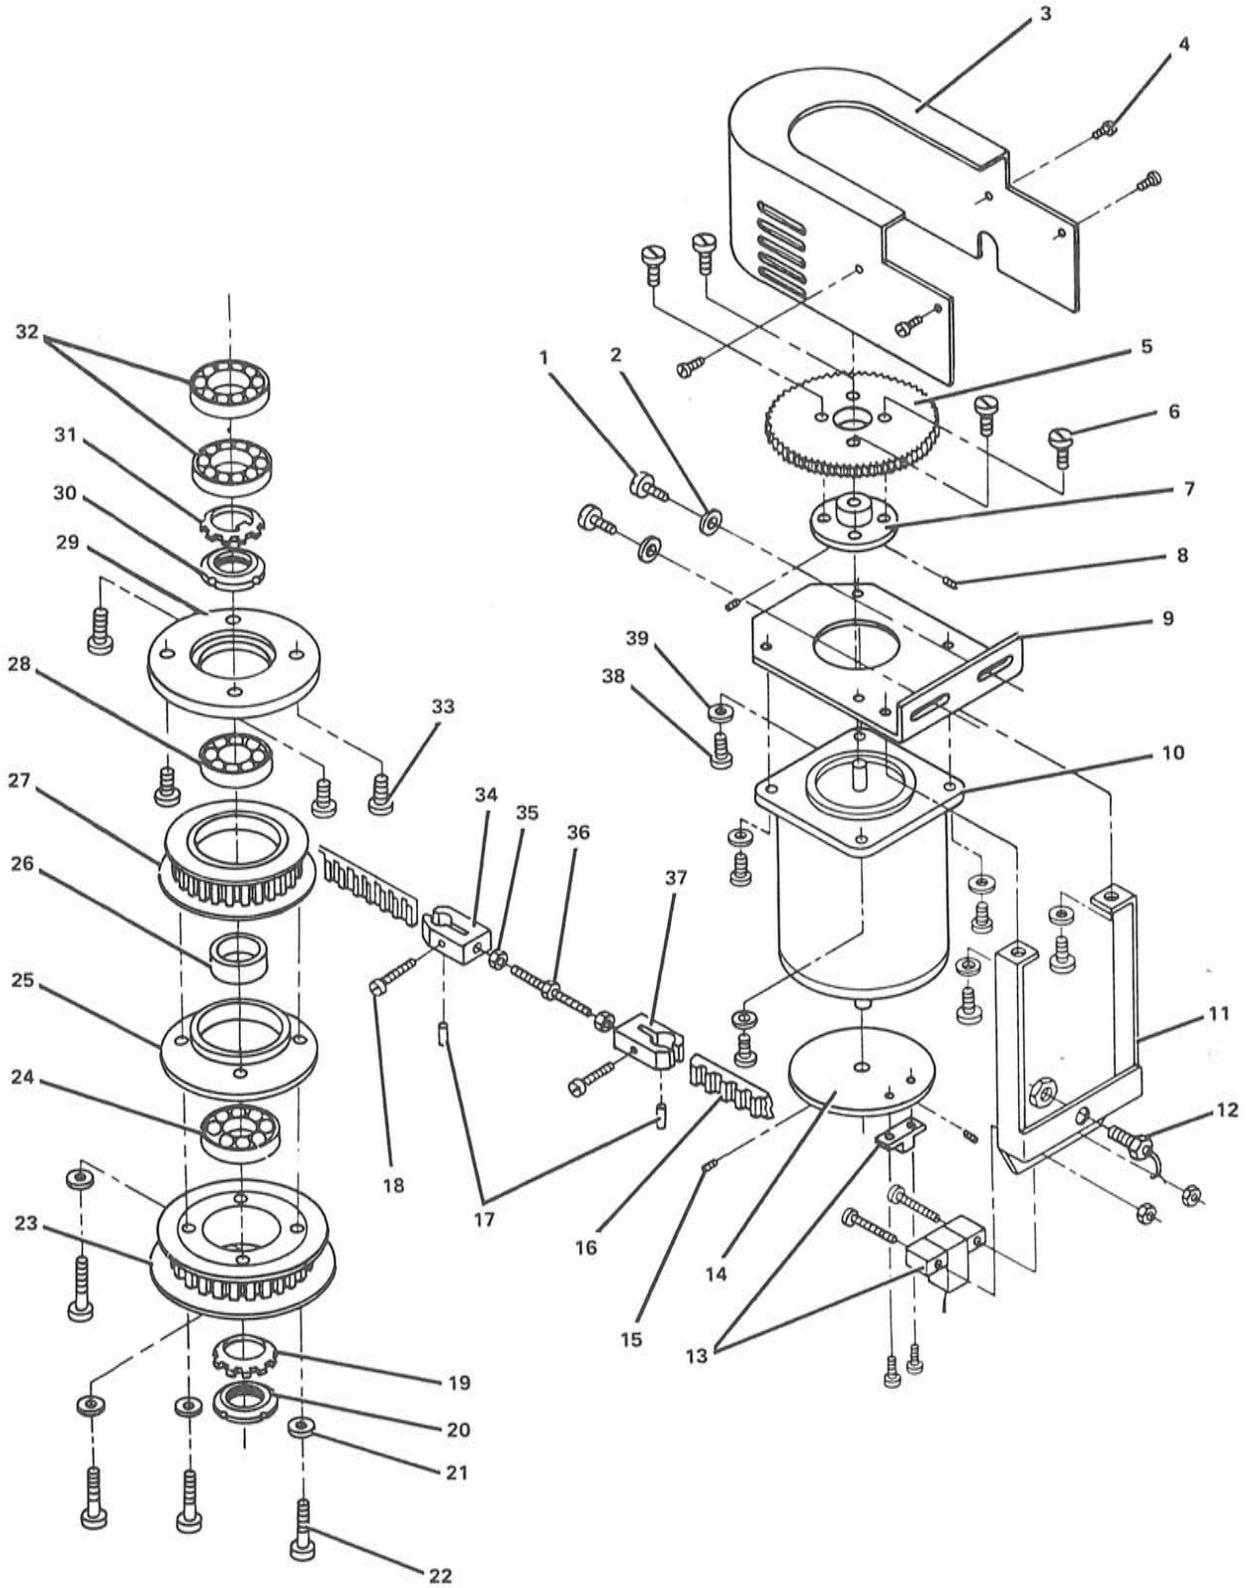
ROLL MOTOR AND DRIVE ASSEMBLY. SEE LIST 6.
